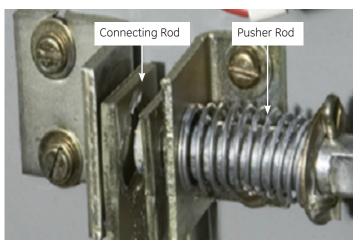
View of unblocked Pusher Rod when the contactor is open.
